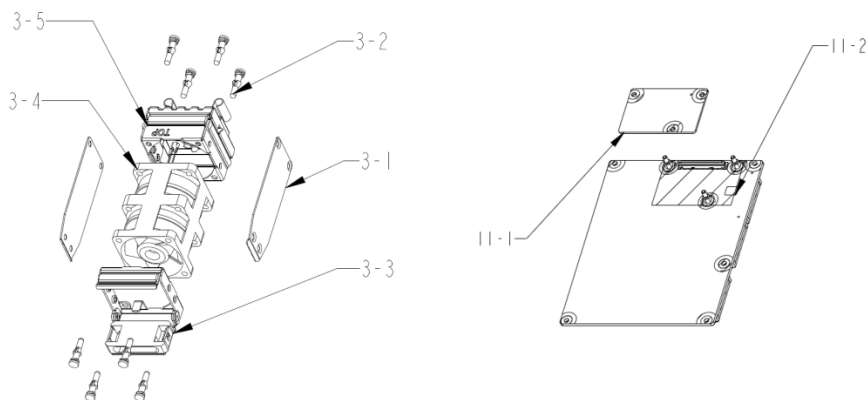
Treatments to fan-assembly 3 Figure 6 Treatments to PCB-assembly 11
